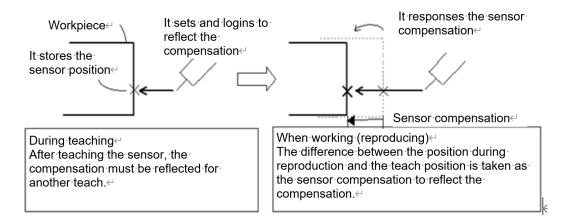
Detailed diagram of welding seam search principle
